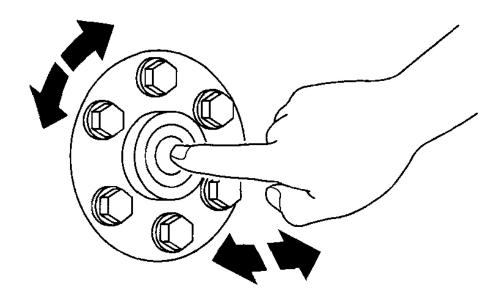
Inspecting Clutch Release Collar Courtesy of MAZDA MOTORS CORP.
